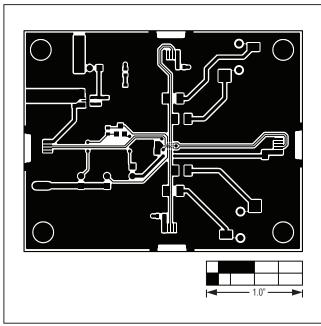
MAX14532E EV Kit PCB Layout—Component Side
